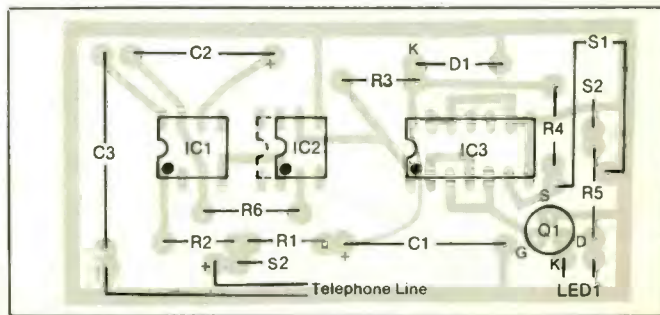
Wiring guide for pc board and rough component placement guide when using perforated board.
